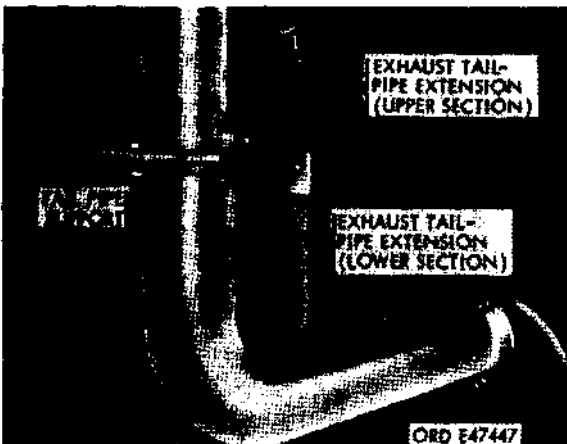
Exhaust tailpipe extensions installed - upper and lower sections
